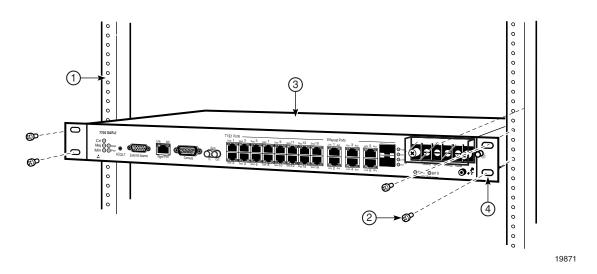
Installing the 7705 SAR-F Chassis in a Rack
